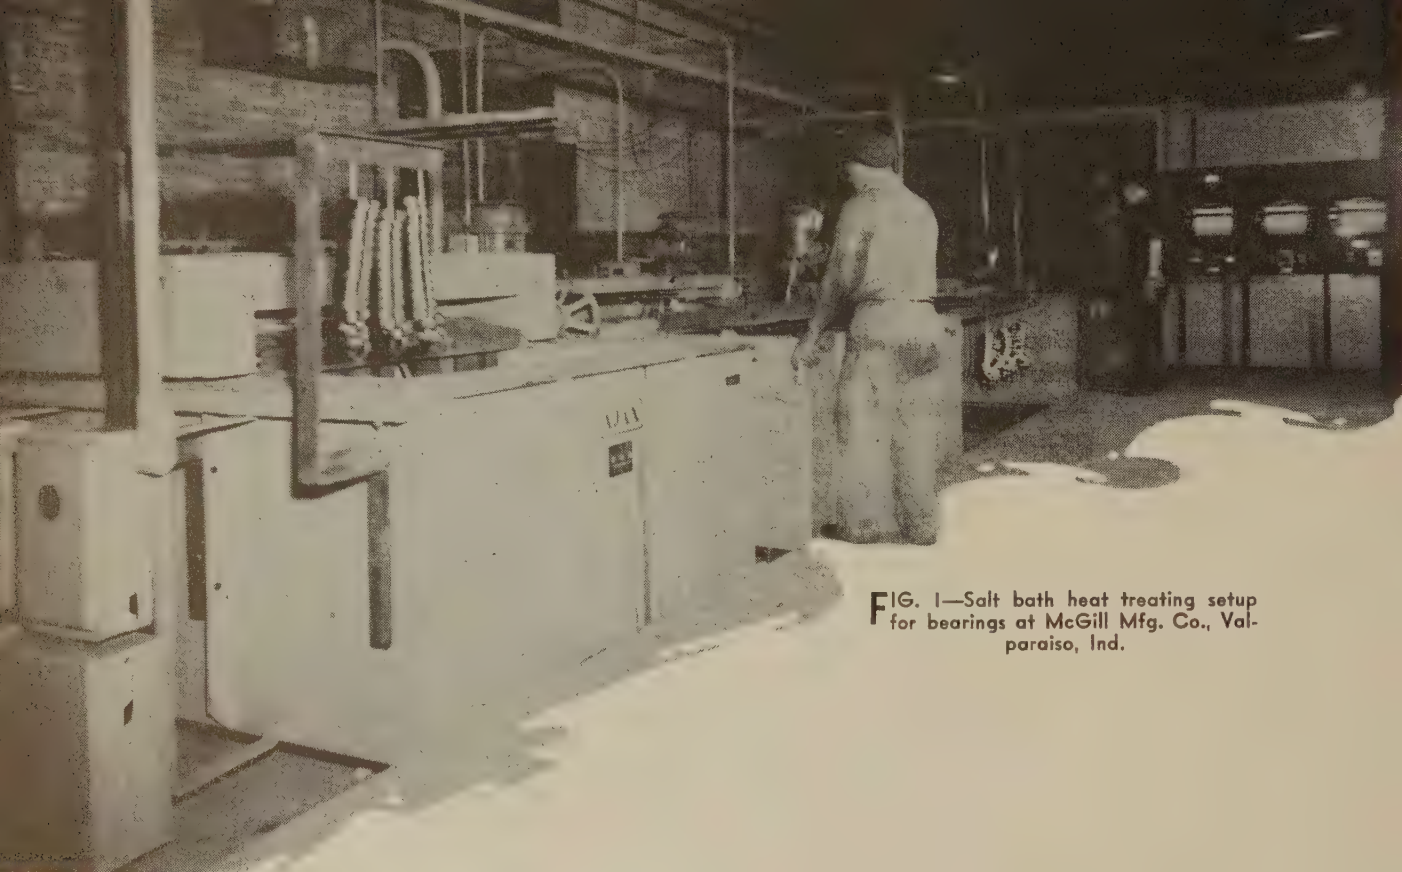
Salt bath heat treating setup for bearings at McGill Mfg. Co., Valparaiso, Ind.
